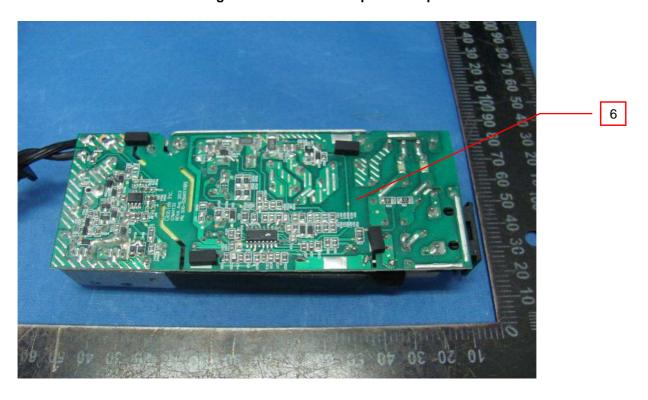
GT*41133 series Soldering side view of PCB for power adapter model
